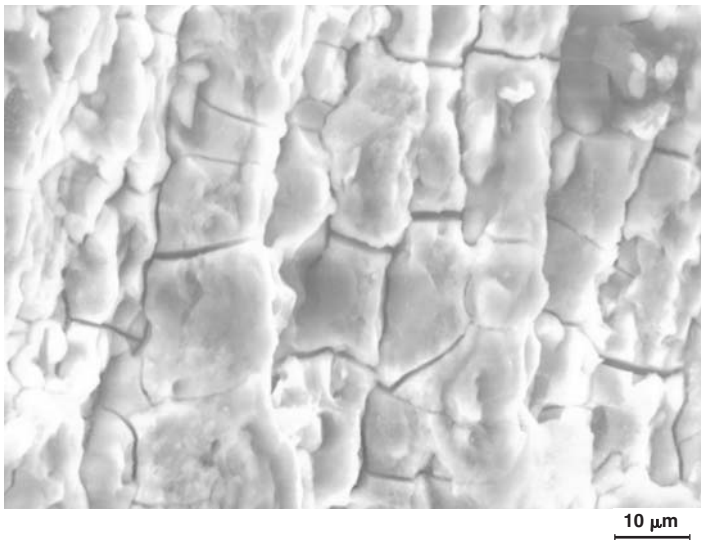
Mud cracking on the oxide layer of fracture surface
